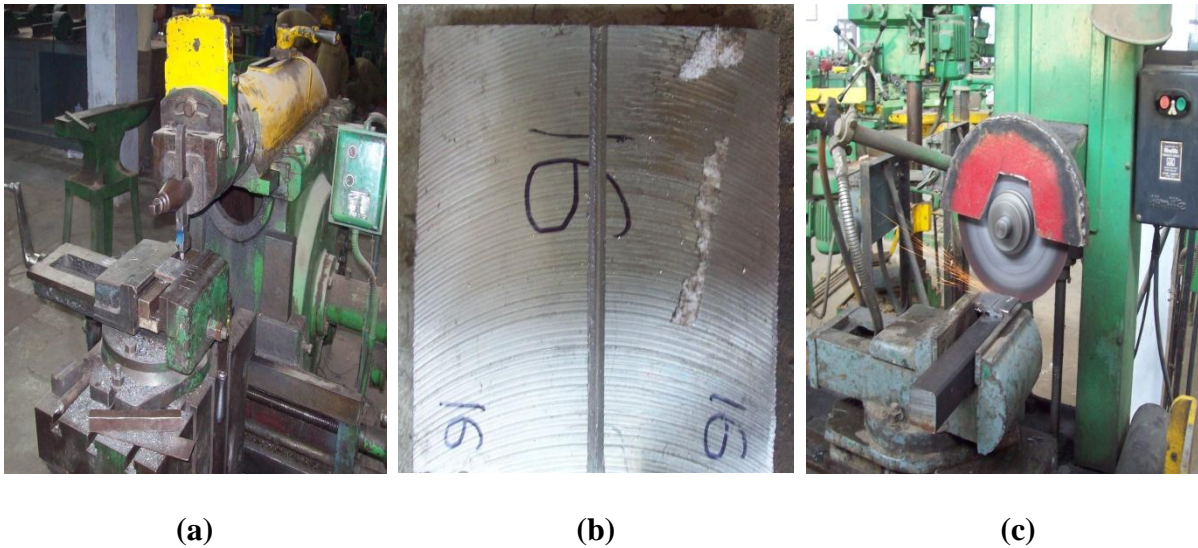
(a) Making of V groove on shaping machine (Courtesy: Central Workshop, Thapar University, Patiala), (b) Specimen after V groove, (c) Cutting of specimen for testing on surface grinding machine
